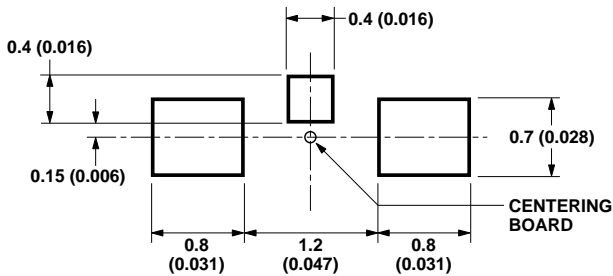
Recommended soldering pad pattern for HSMW-B120.
